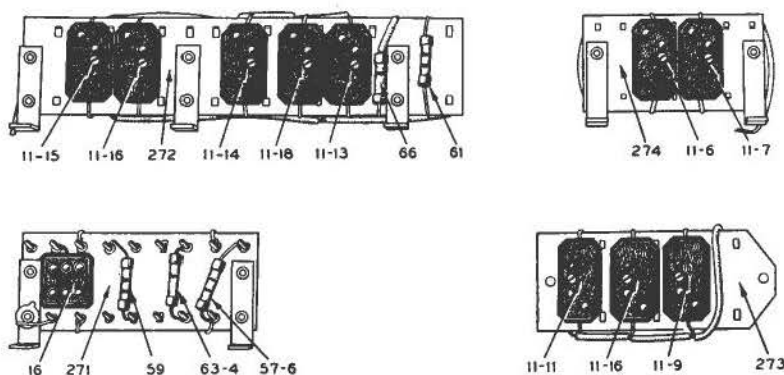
Liaison Receiver BC-348-H—Resistor Board Assemblies View B
